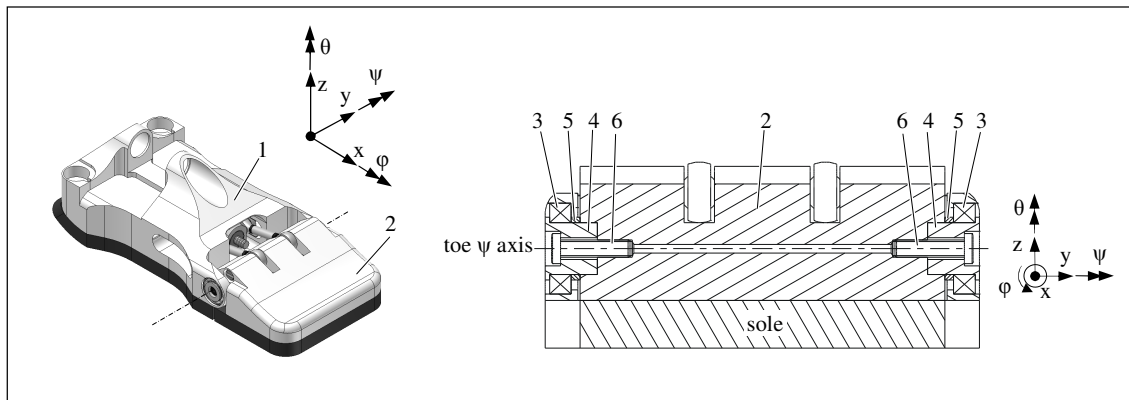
Isometric front view (above left) of foot and toe. Section view in  $yz$ -plane of the toe  $\psi$  joint; base foot (1), toe (2), single row deep groove ball bearings (3), bushes (4), distance rings (5), M4 bolts (6).
